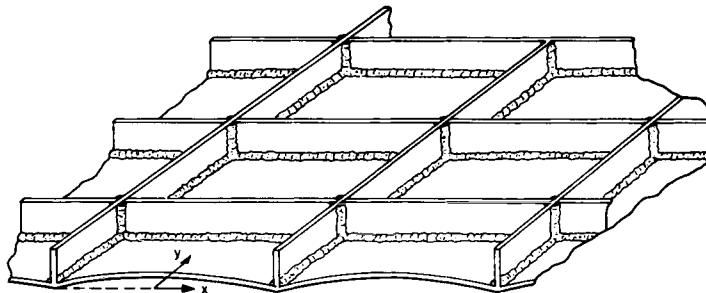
Panel structure with longitudinal and transverse stiffeners.
